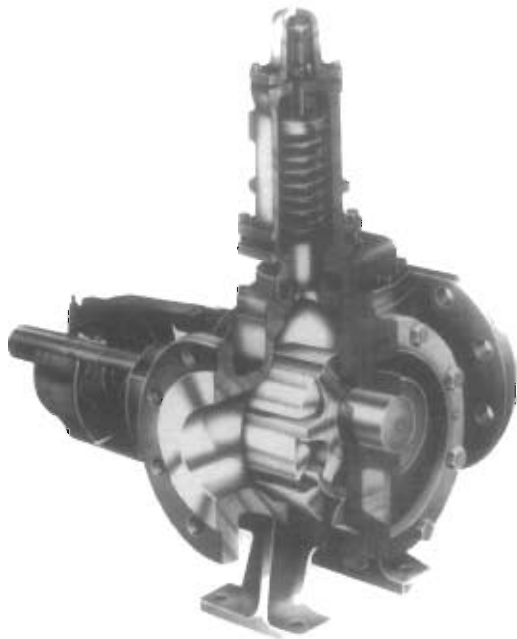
An internal gear pump with heating jacket and double mechanical seal
